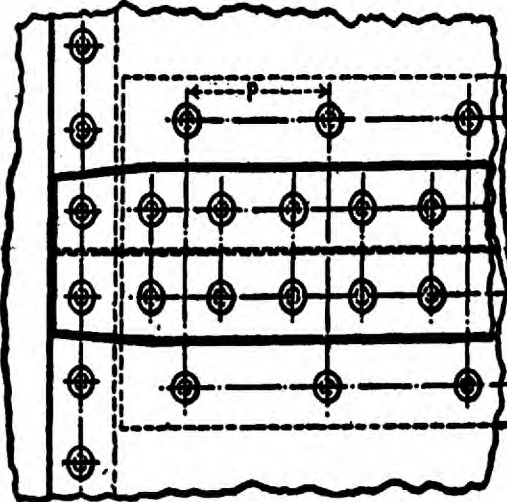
Example of Butt and Double Strap Joint, Double-Riveted.
